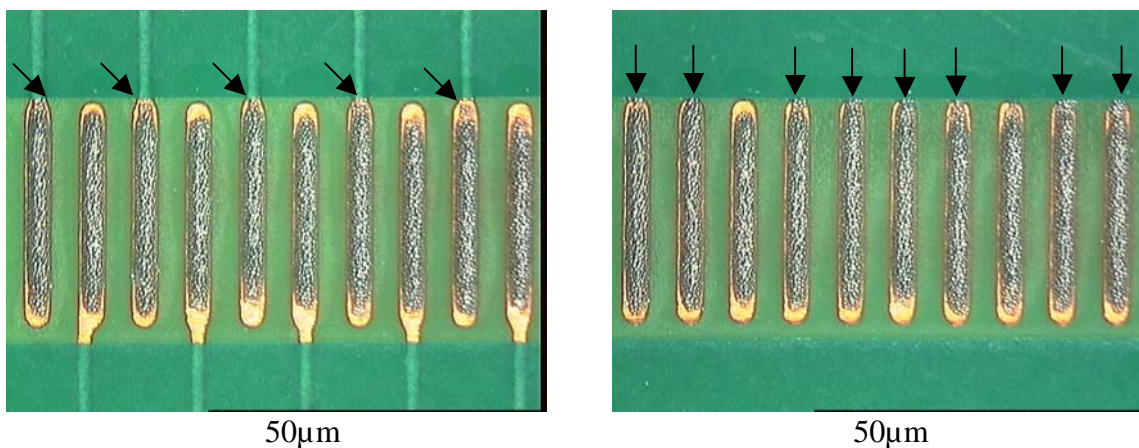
Typical prints with 0.4 mm pitch on the different thickness of solder resist Board (print direction from bottom to top of image)
